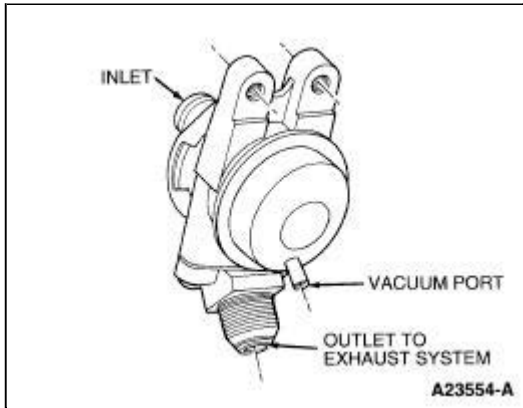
Air Injection Diverter (AIR Diverter) Valve
